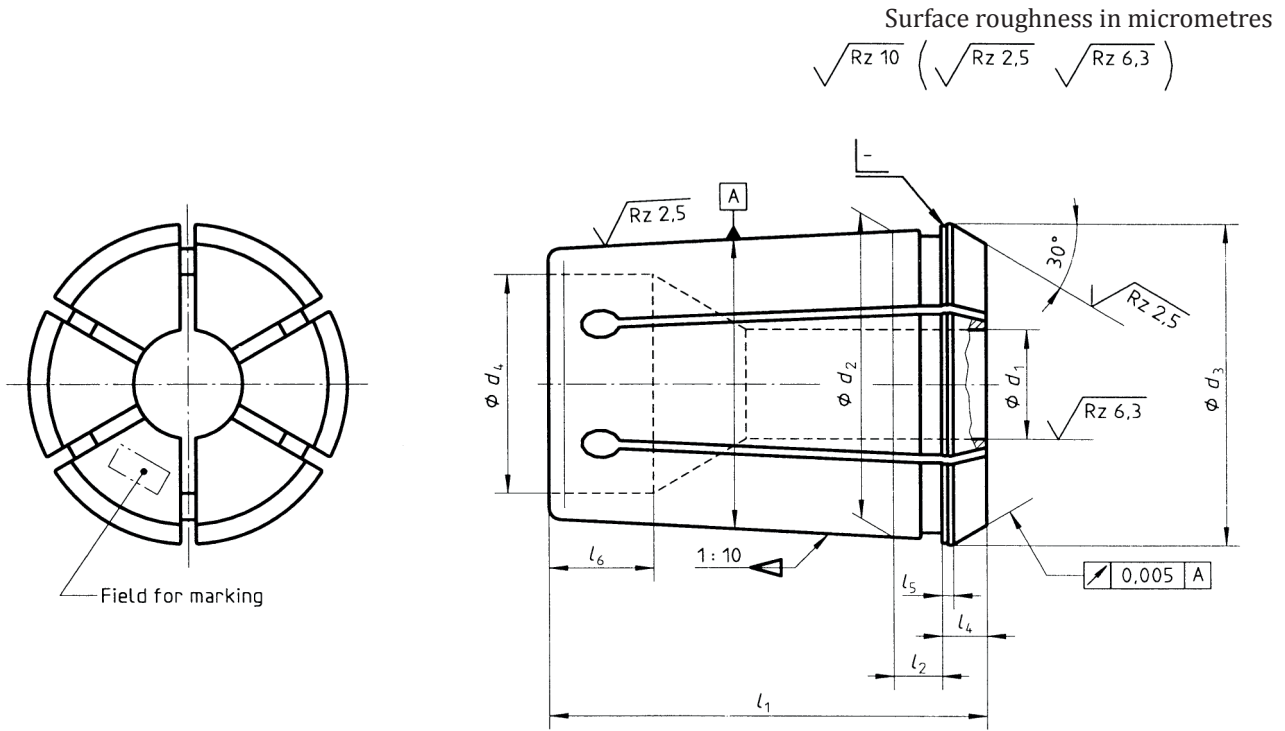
Collet form A, unilaterally slotted, with short clamping bore for cylindrical shanks
